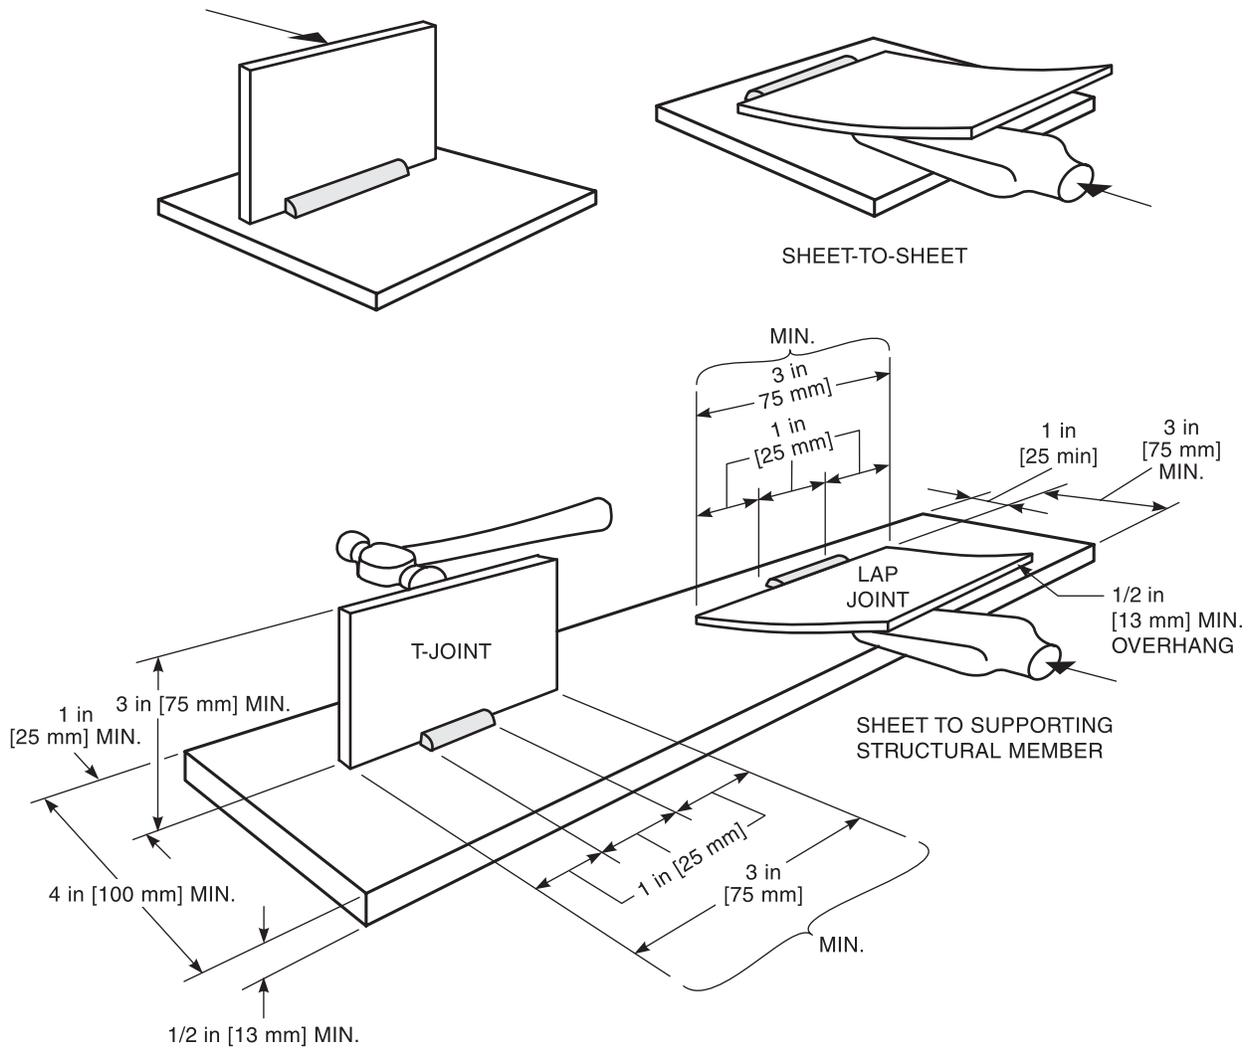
A—Test for Fillet Welds [see 4.6.2.2(1)]
